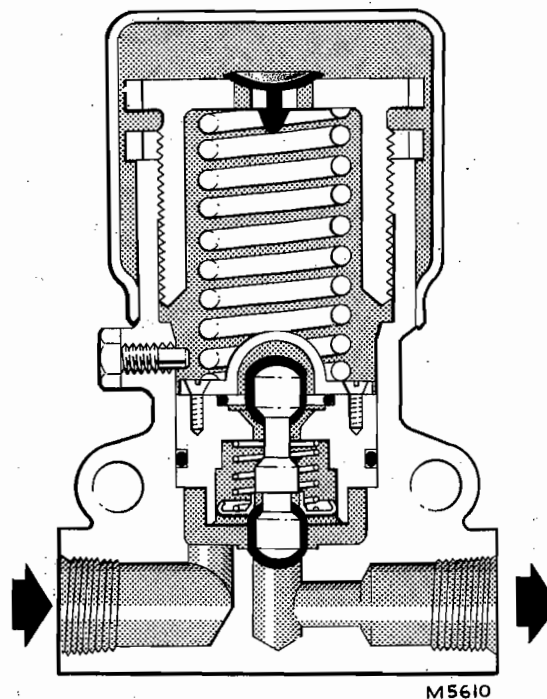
SECTION OF PRESSURE PROTECTION VALVE
